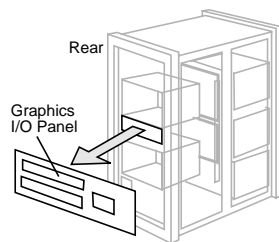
Rackmount Chassis Component - Graphics I/O panel
